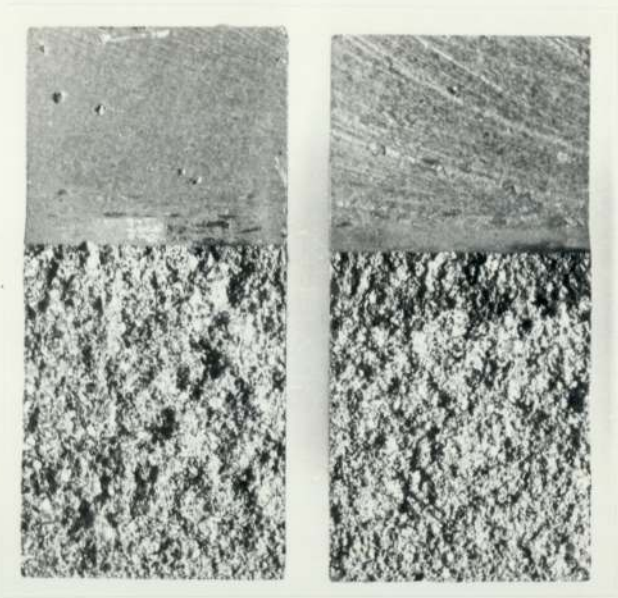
Fracture surface of two machine notched and pre-fatigue cracked specimens. As cast A 354 alloy. Magnification x 3.
